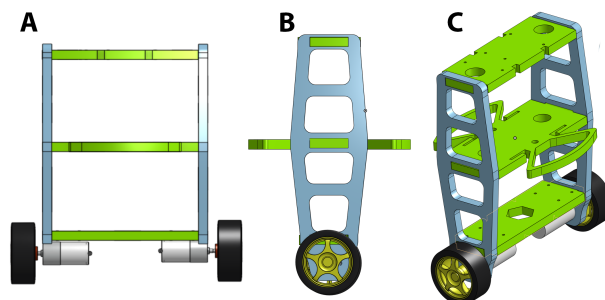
Assembled self-balancing robot in Onshape assembly: (a) Front view, (b) Side view, and (c) 3D view, illustrating the integration of the chassis components, motors, and wheels..
